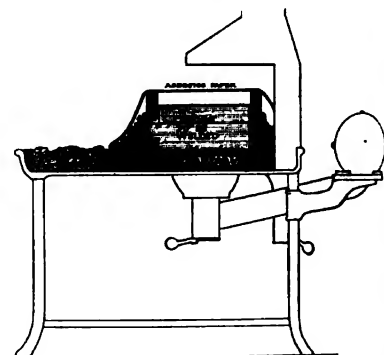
IT IS CHEAPER TO PREHEAT IN A FORGE
